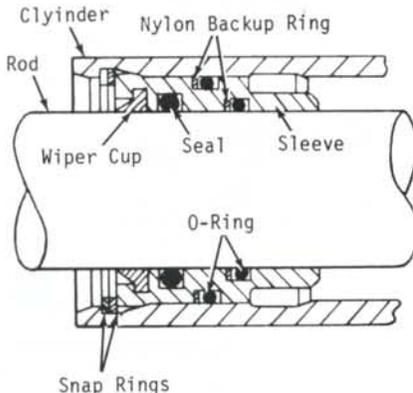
Diagram showing correct placement of "O" rings and backup rings on sleeves of steering cylinder used on David Brown front drive axle.
